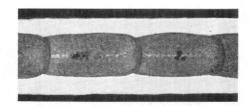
Seam weld in stainless steel (D.T.D.171).
